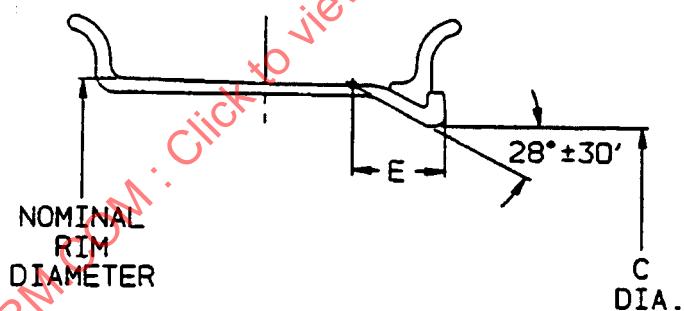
MULTI-PIECE FLAT BASE RIM
